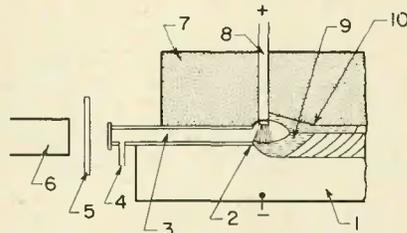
Schematic arrangement for photographing the events taking place in the arc zone. 1 base plate; 2 arc envelope; 3 ceramic tube; 4 gas; 5 filter; 6 camera objective; 7 flux; 8 electrode; 9 weld pool; and 10 slag
